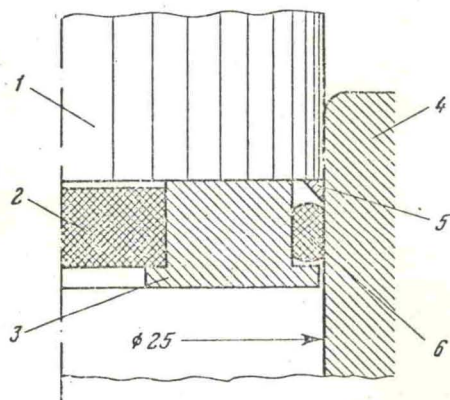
Seal prior to compression: 1) piston; 2) vacuum rubber seal; 3) curved washer (St. 3); 4) cylinder; 5) extrusion-preventing ring (U7 steel,  $HR_C \approx 22$ ); 6) vacuum rubber ring.
